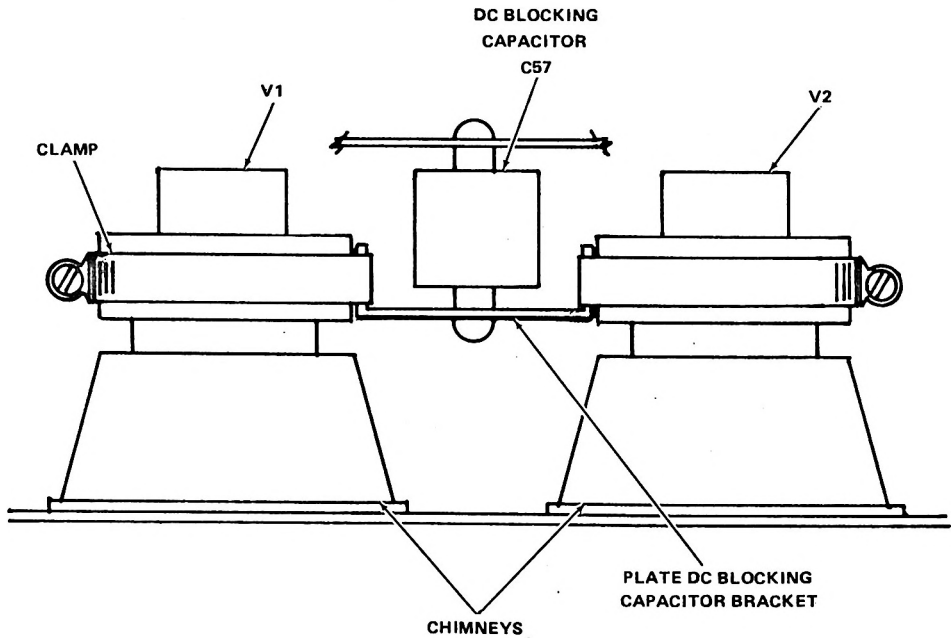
DRIVER TUBE REPLACEMENT
